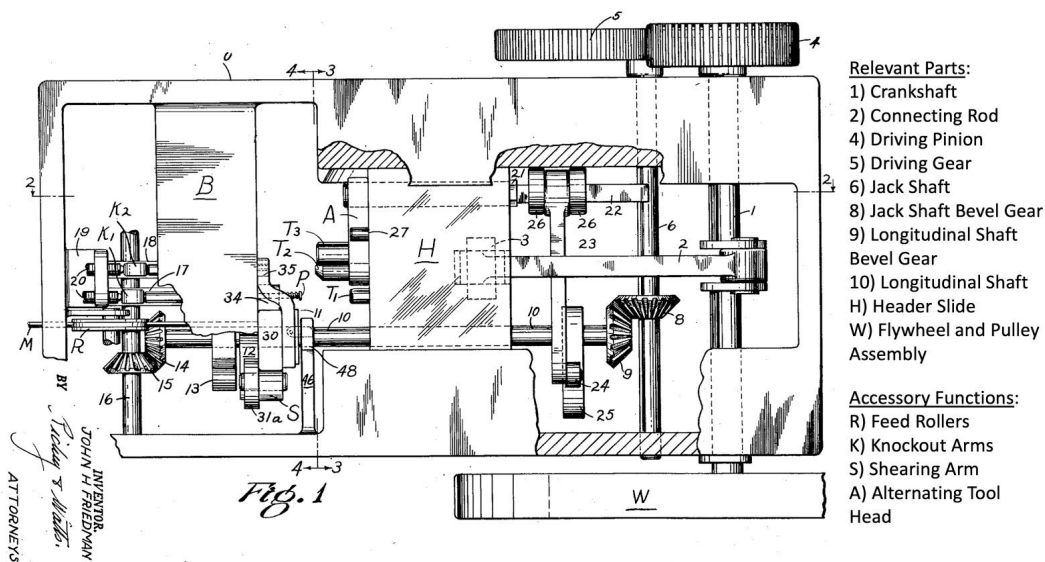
Patent Drawing of Cold Forging Header with Relevant Parts and Accessory Functions Labeled
